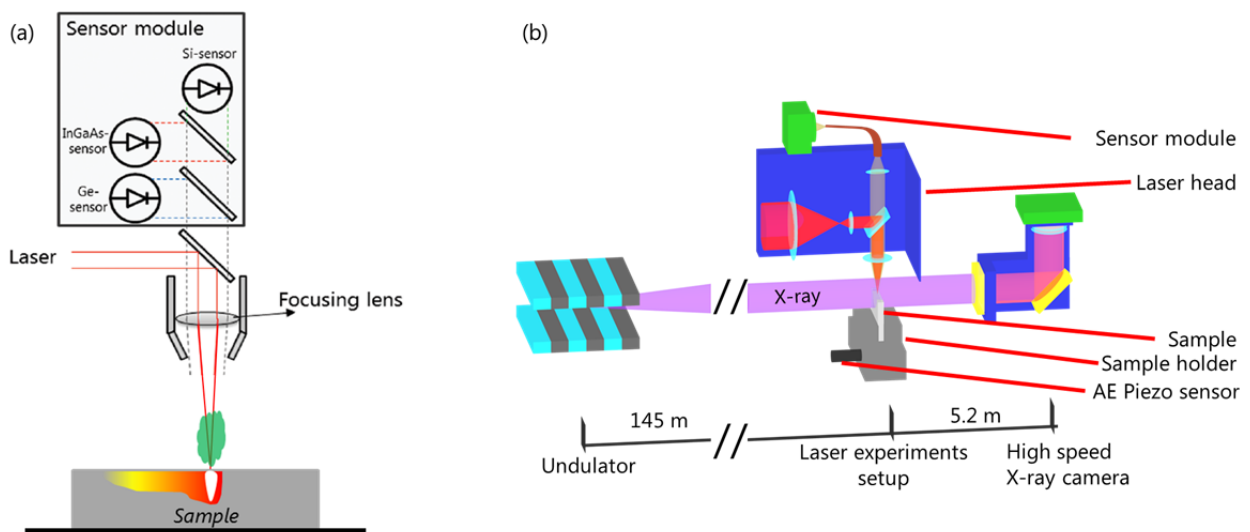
(a) The diagram of the laser head including optical sensors, adapted from Vakili-Farahani et al. [10], and (b) The setup for the laser welding experiments.
